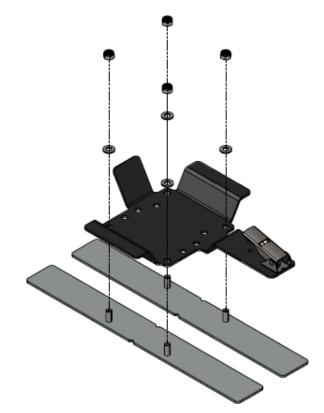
BOTTOM ASSEMBLY OF RS1 MOUNT
